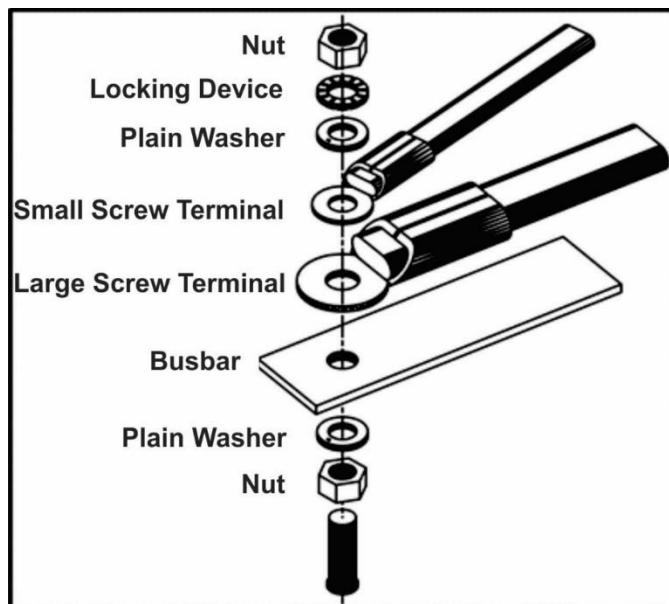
Multiple Electrical Connections at a Single Terminal
